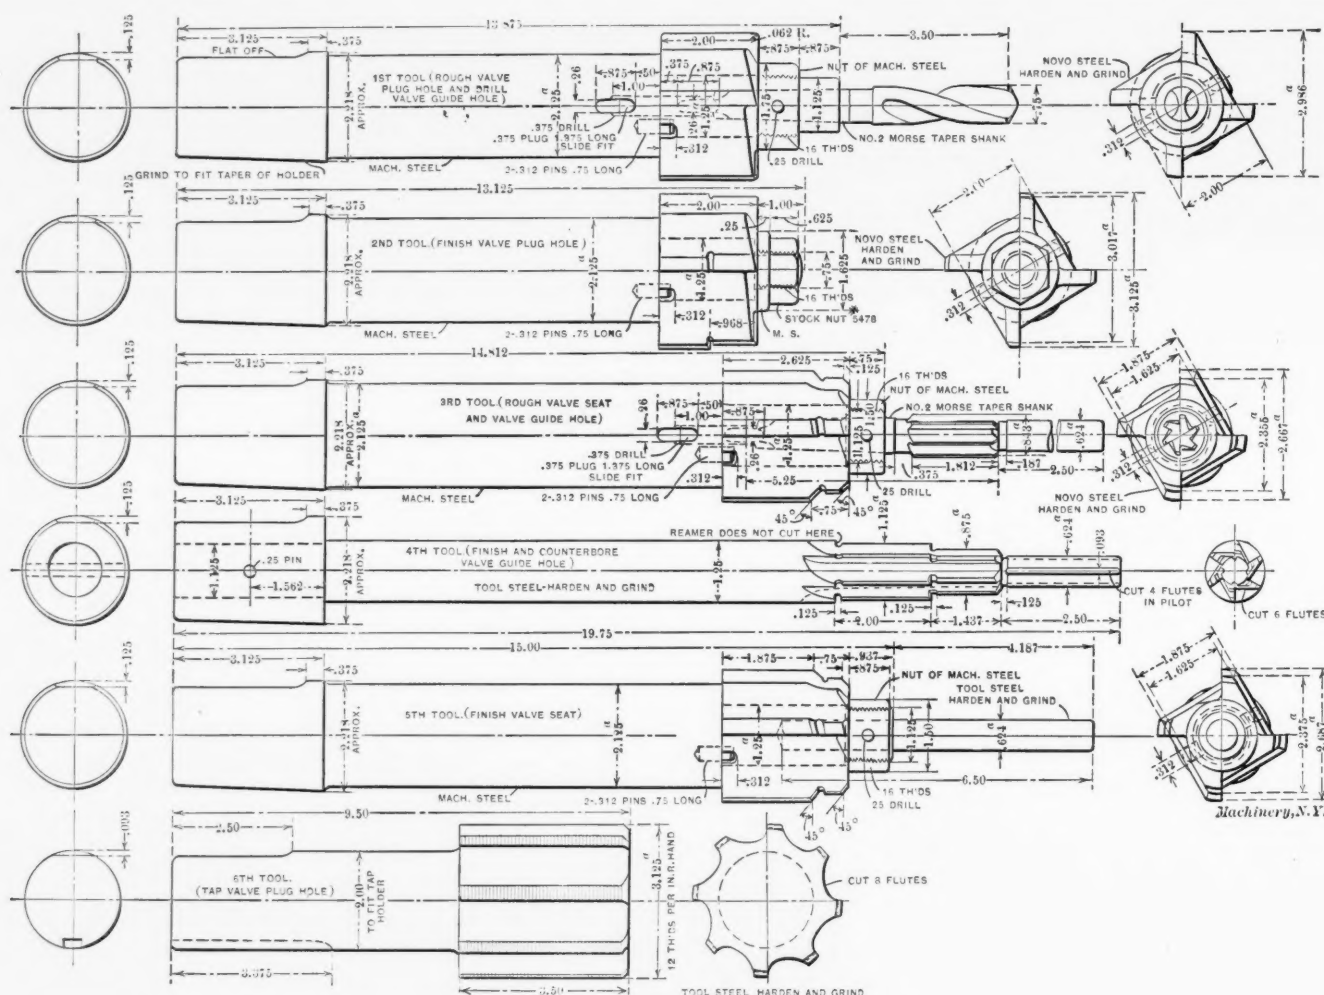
Complete Set of Tools for Finishing Valve Holes.
